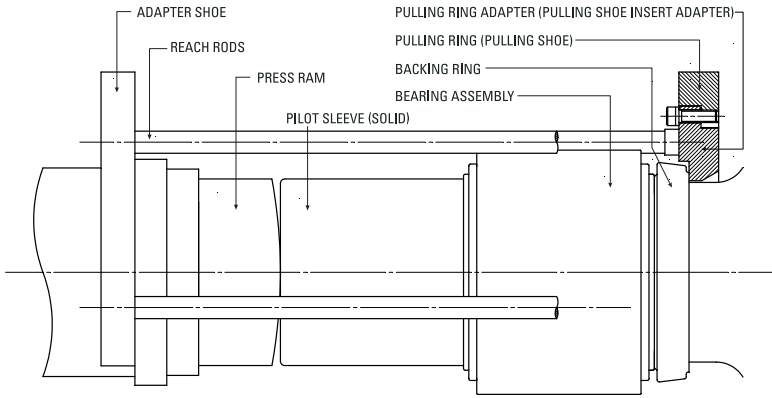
Fixture for removing a bearing with a bearing press or wheel press.
